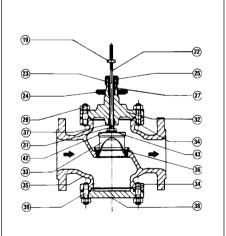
Model 21 single seated valve body direct acting DN 65 to DN 100
